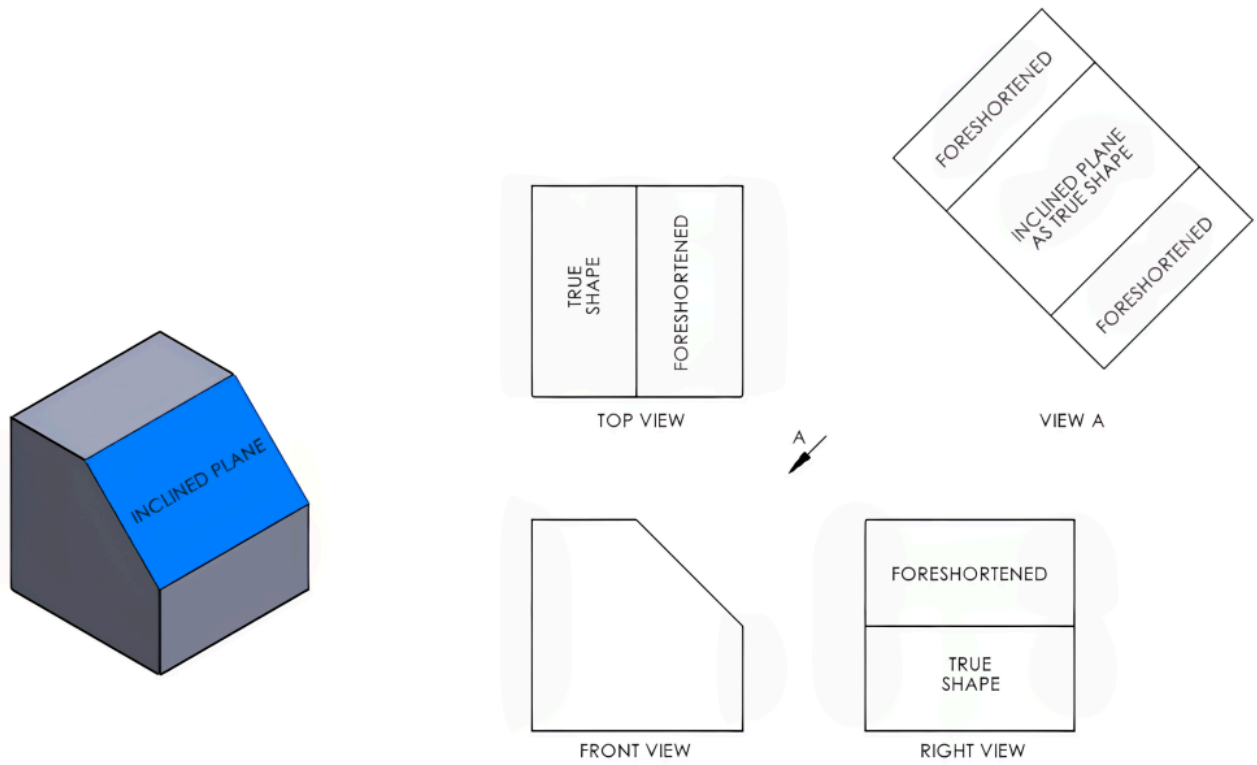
An auxiliary view provides a true shape view of the inclined plane.
